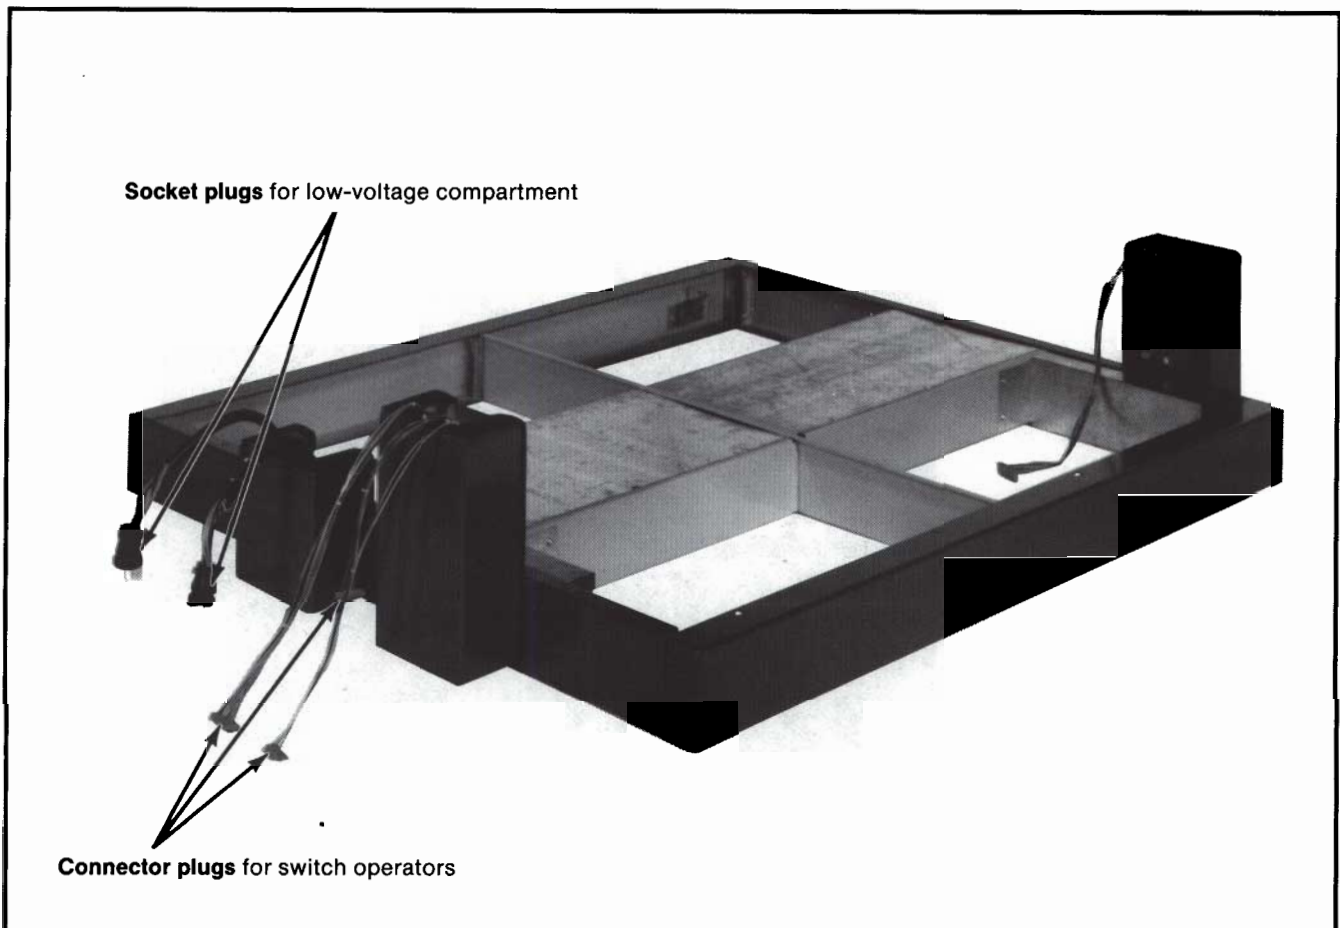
Fully assembled interconnecting-control-wiring base spacer prior to installation gasketing and mounting of the pad-mounted gear, except short flaps of internal ducts are not loose.
